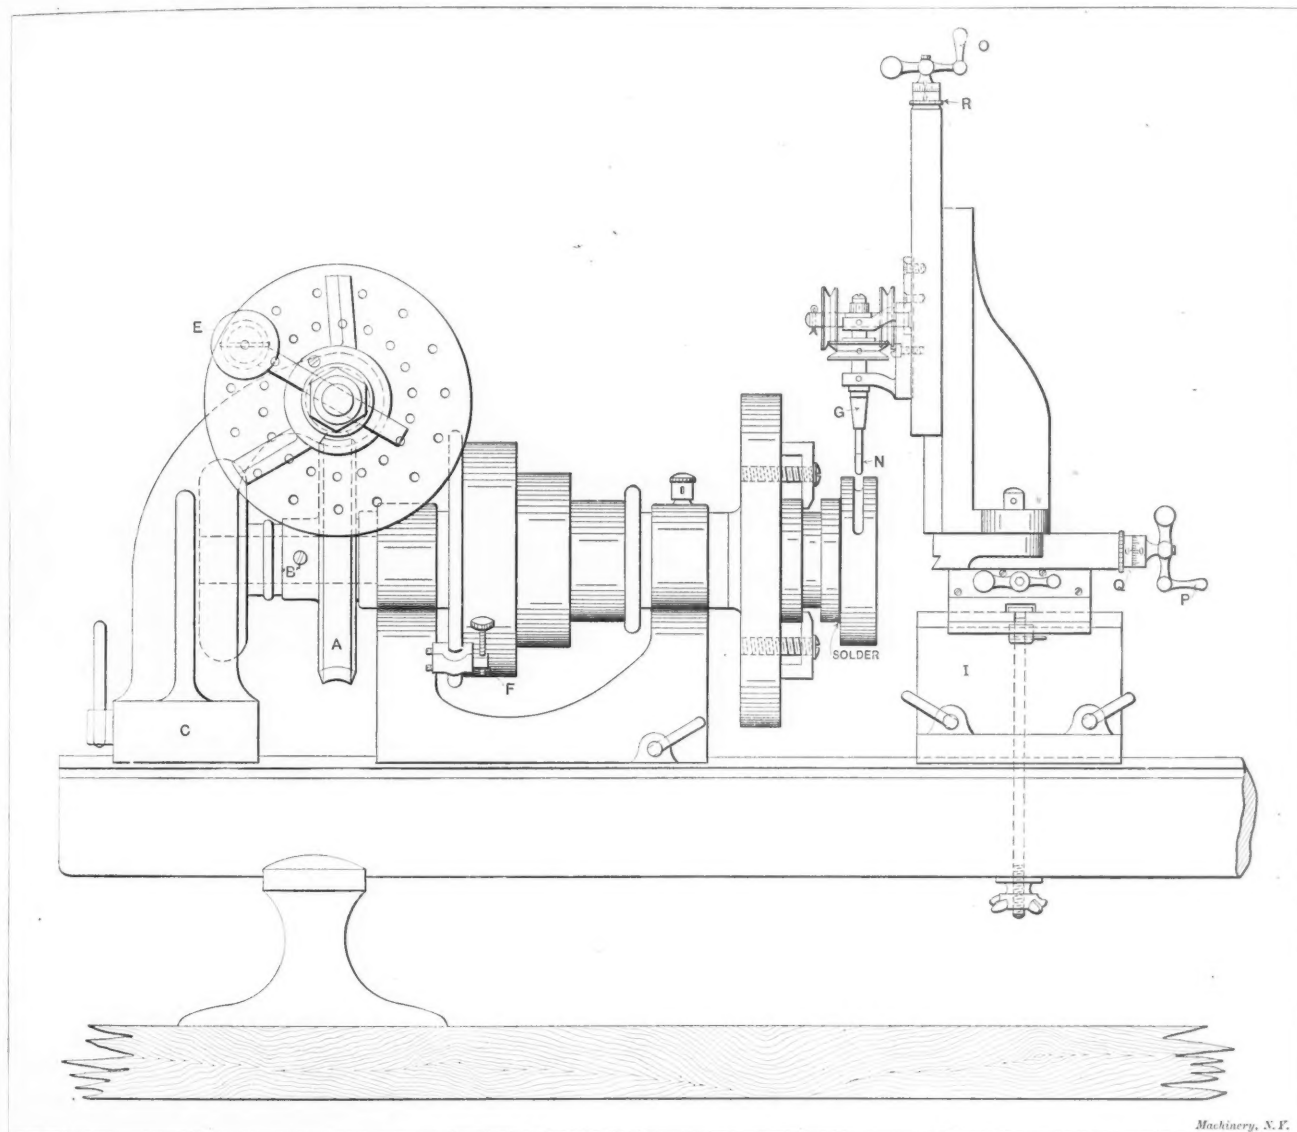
The Lathe Set Up for a Vertical Milling Operation
